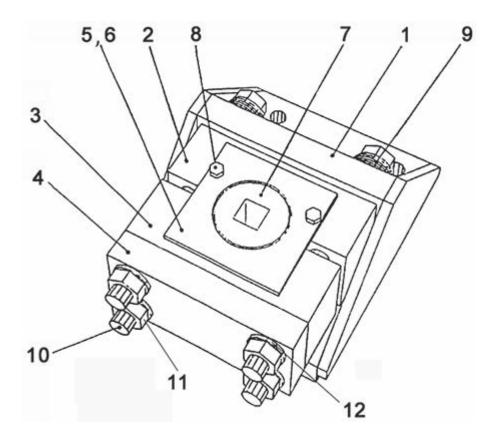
Brake device, large — For machines with shaft sizes $20~\mathrm{mm}$, $25~\mathrm{mm}$ and $40~\mathrm{mm}$
